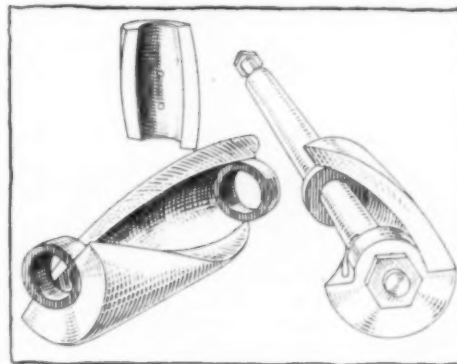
HELICAL GUIDES FOR CUTTER SPINDLES IN THE SYKES DOUBLE HELICAL-GEAR GENERATOR
